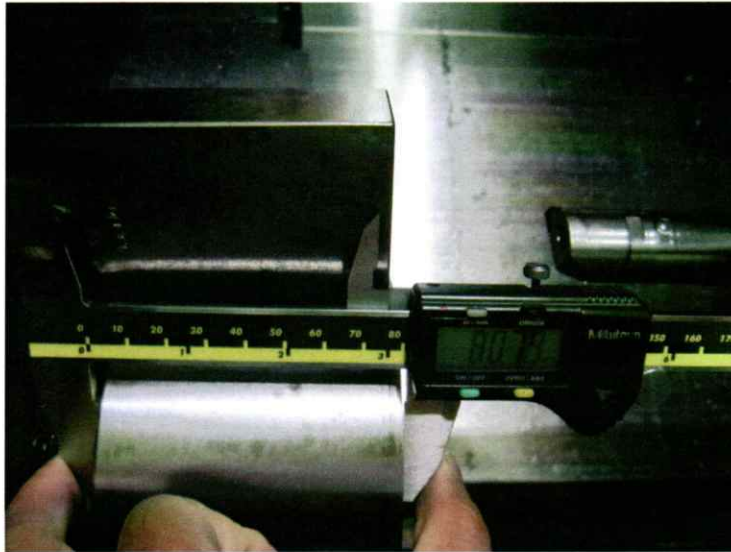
Machining depth of inner diameter of the workpiece in the axial direction (i.e. length of the workpiece)
